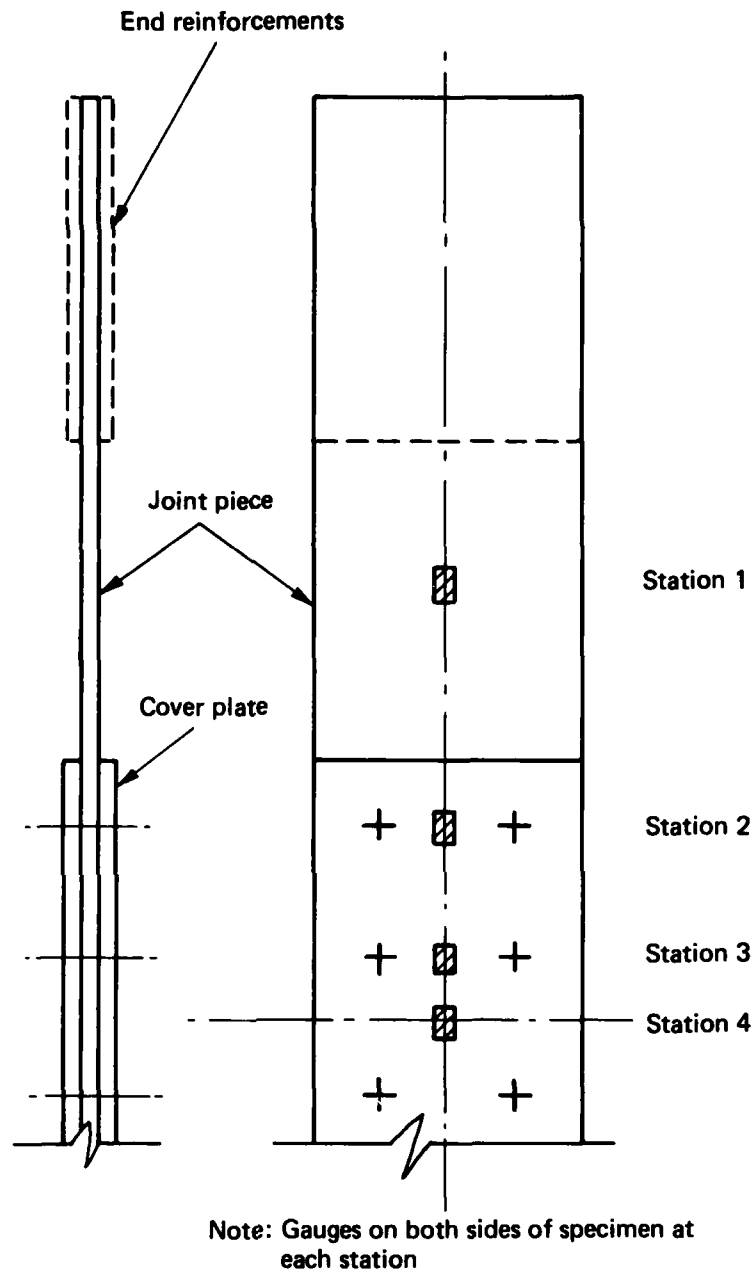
POSITION OF GAUGES ON STRAIN GAUGED SPECIMENS
